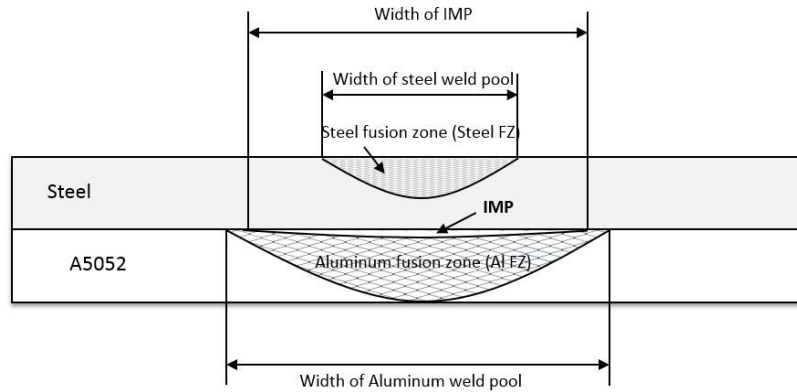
Schematic representative of the welding width of steel/A5052 aluminum alloy and the welding pool width of aluminum alloy.
